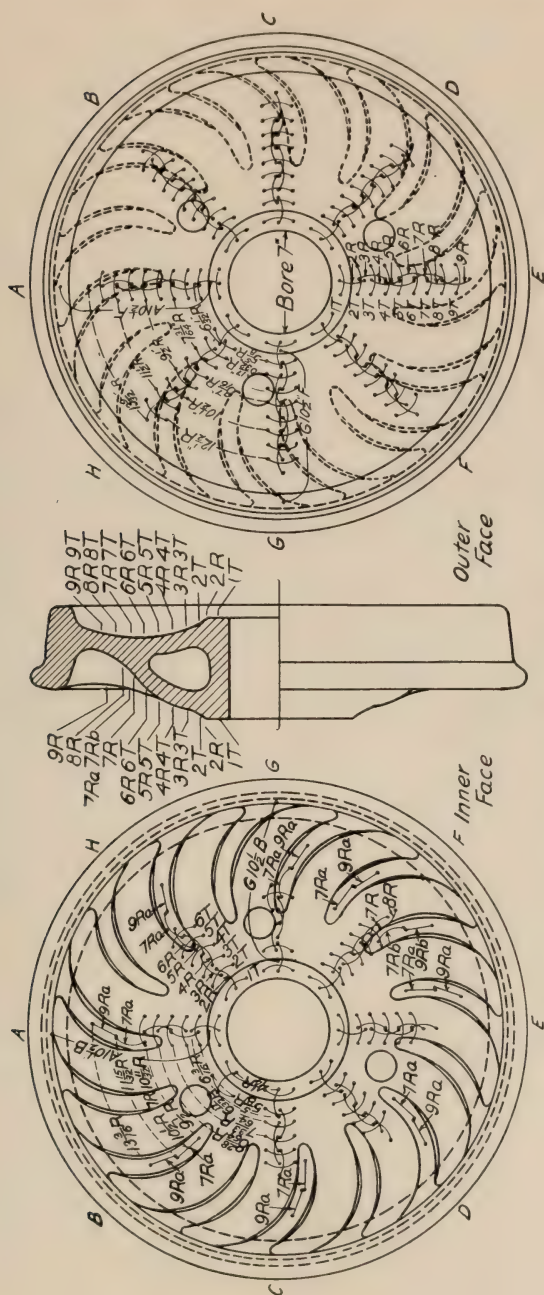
LOCATION OF GAGE-LINES ON 33-IN. 740-LB ARCH PLATE WHEEL No. 04 476
